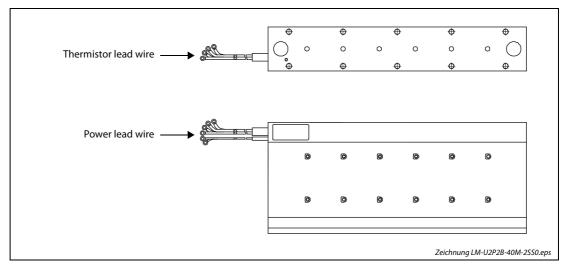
Servo motor series LM-U2 (Primary side – coil)
